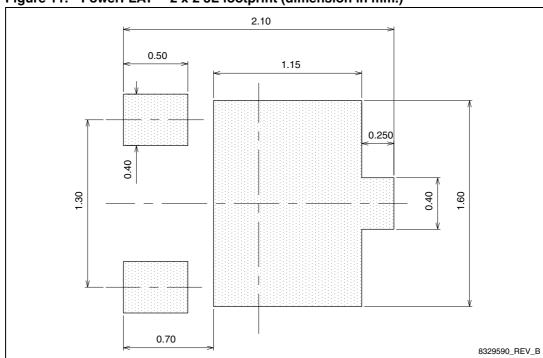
PowerFLAT™ 2 x 2 3L footprint (dimension in mm.)
